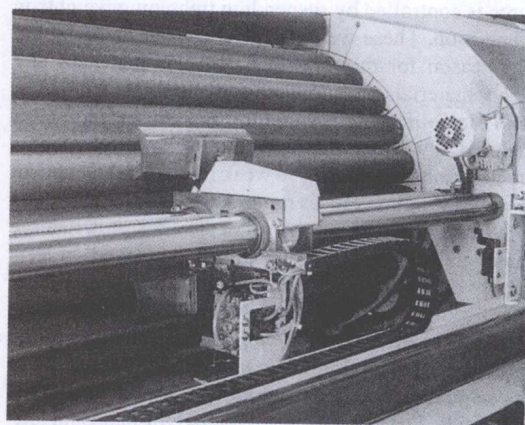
An automatic raising element sharpening device from the Sucker-Müller company.
